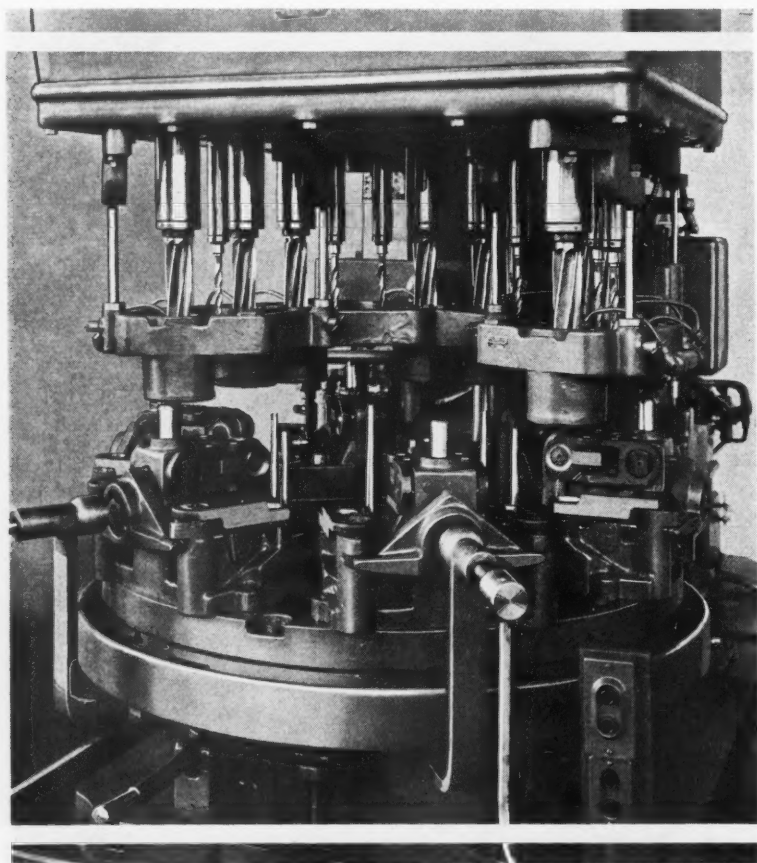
Drilling and Counterboring 280 Tractor Track-links an Hour on a National Automatic Tool Co.'s Vertical Multiple-spindle Drilling Machine
